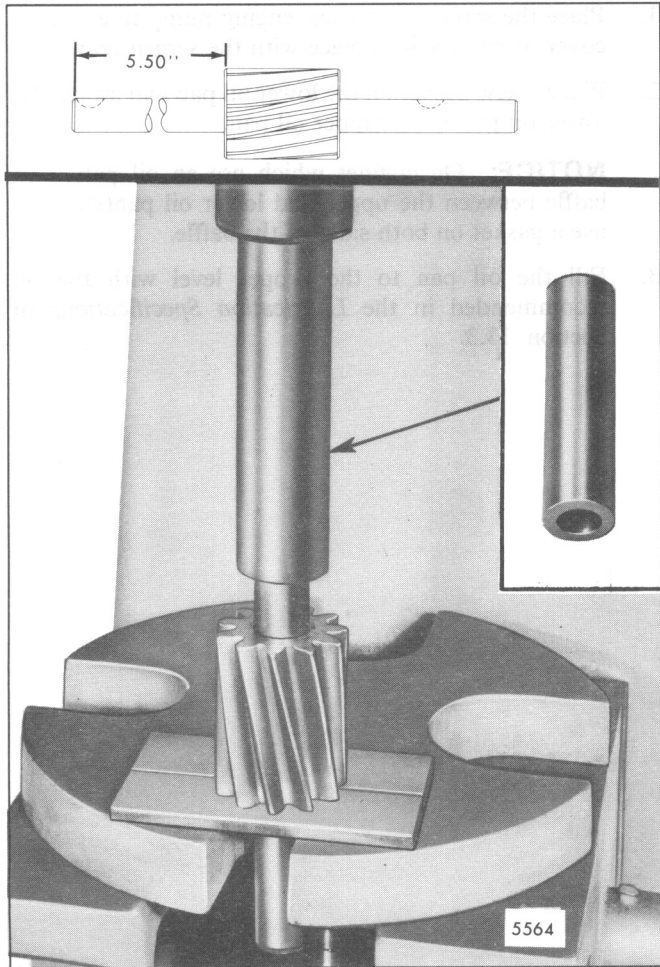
Installing Oil Pump Gear on Shaft using Tool J 9380
